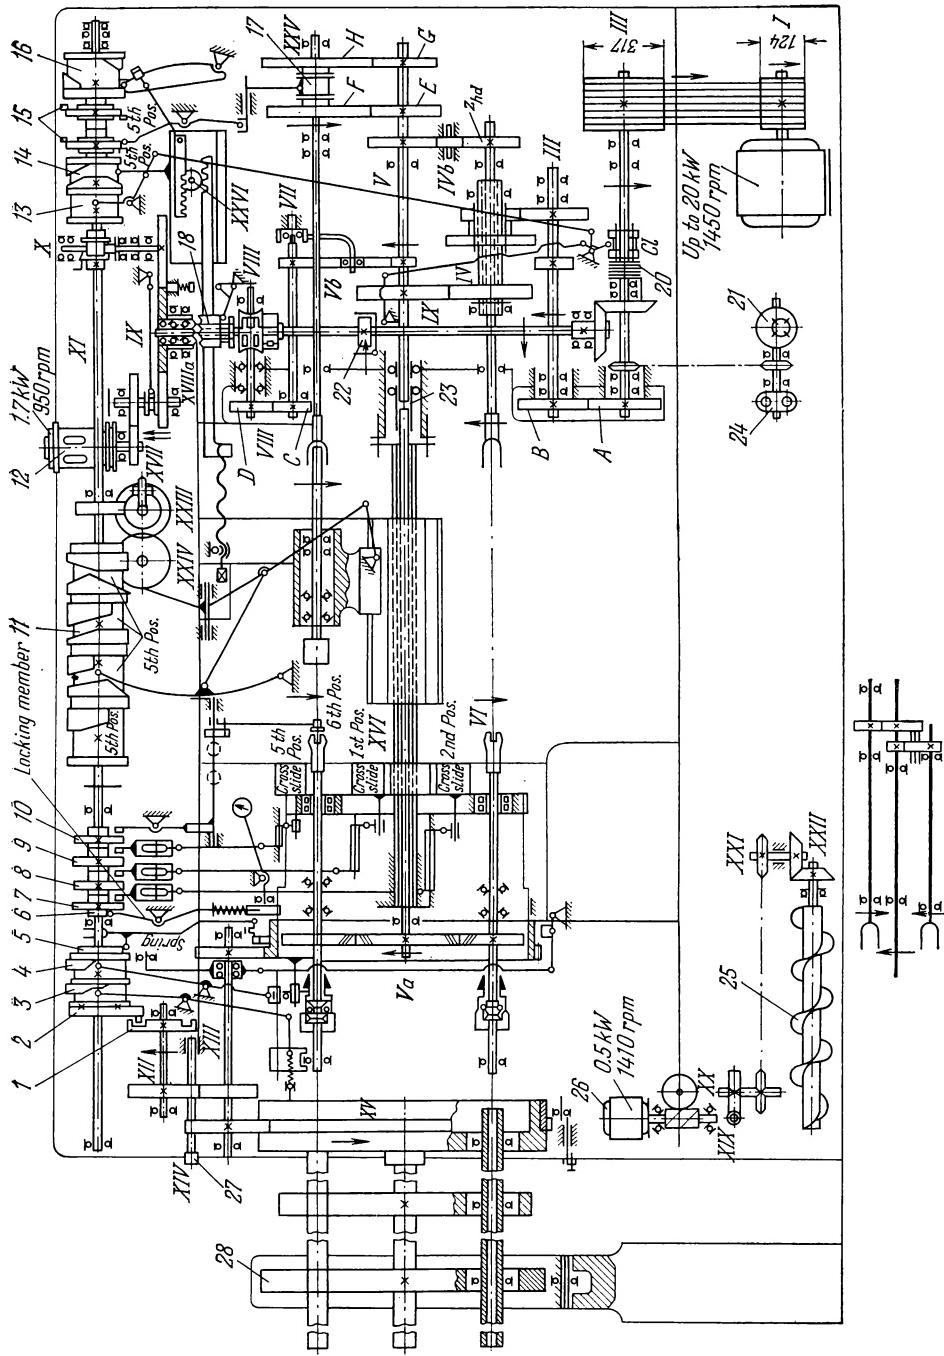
Kinematic diagram of the model 1240-6 six-spindle automatic
